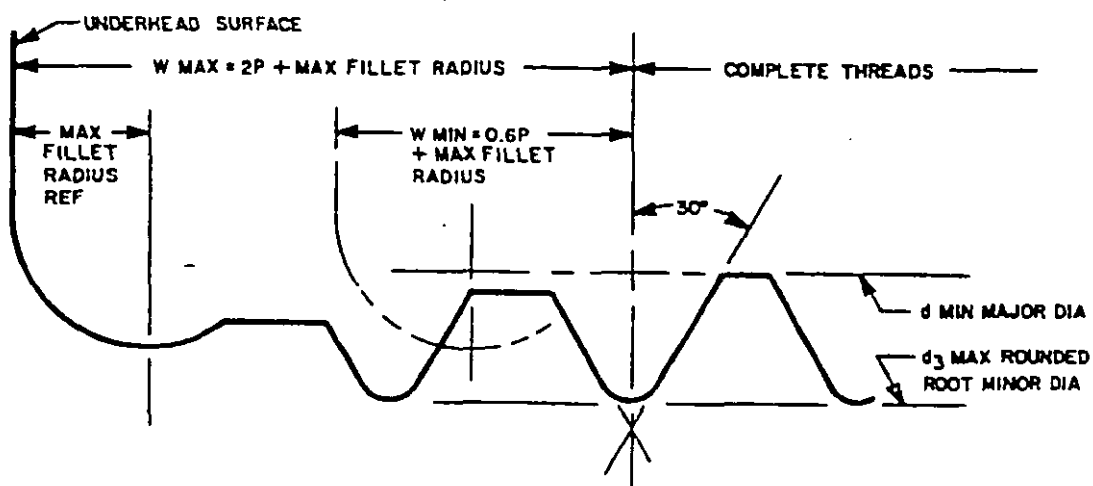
PITCH DIAMETER SHANK FASTENER-THREADED TO HEAD
